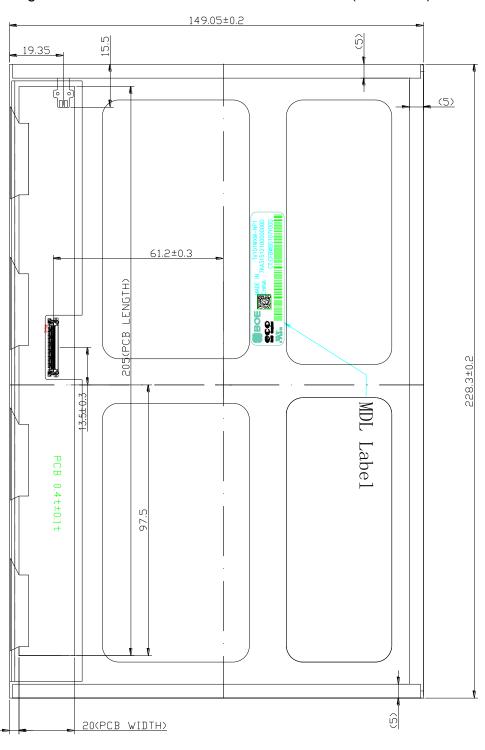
TFT-LCD Module Outline Dimension (Front View)
